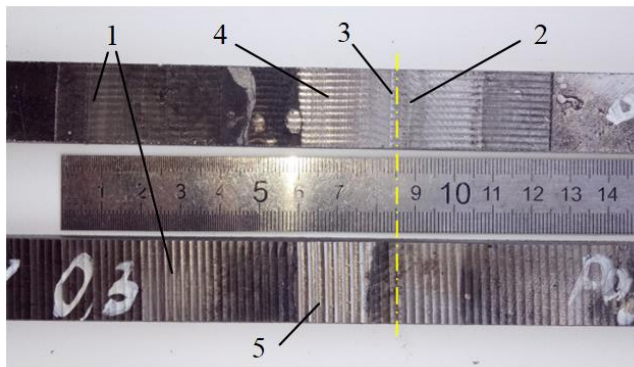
Welded joints: 1) samples with welded joints; 2) area of the welded joint; 3) axis of the welded joint; 4) direction of longitudinal strengthening of the welded joint; 5) the direction of the transverse hardening of the welded joint.
